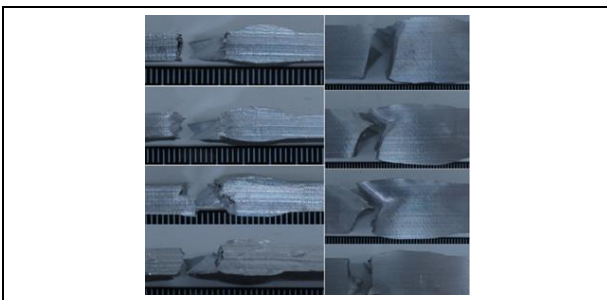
Examples of fatigue cracks developing from the weld toe.
